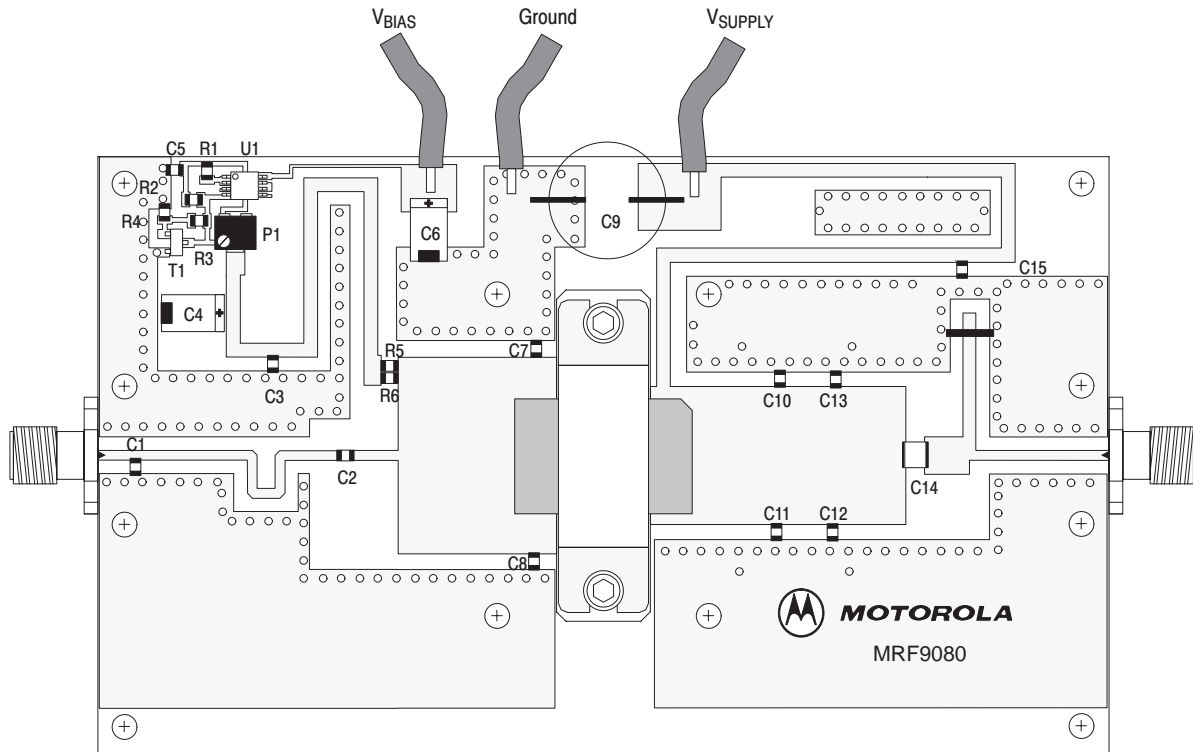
Broadband GSM 900 Optimized Demo Board Component Layout
